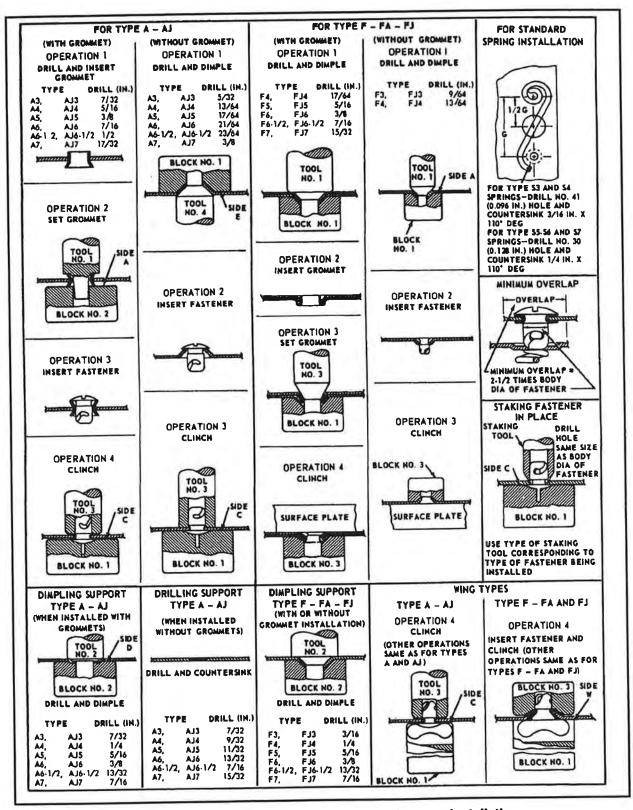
Type A-AJ and F-FA-FJ Dzus fastener installation
